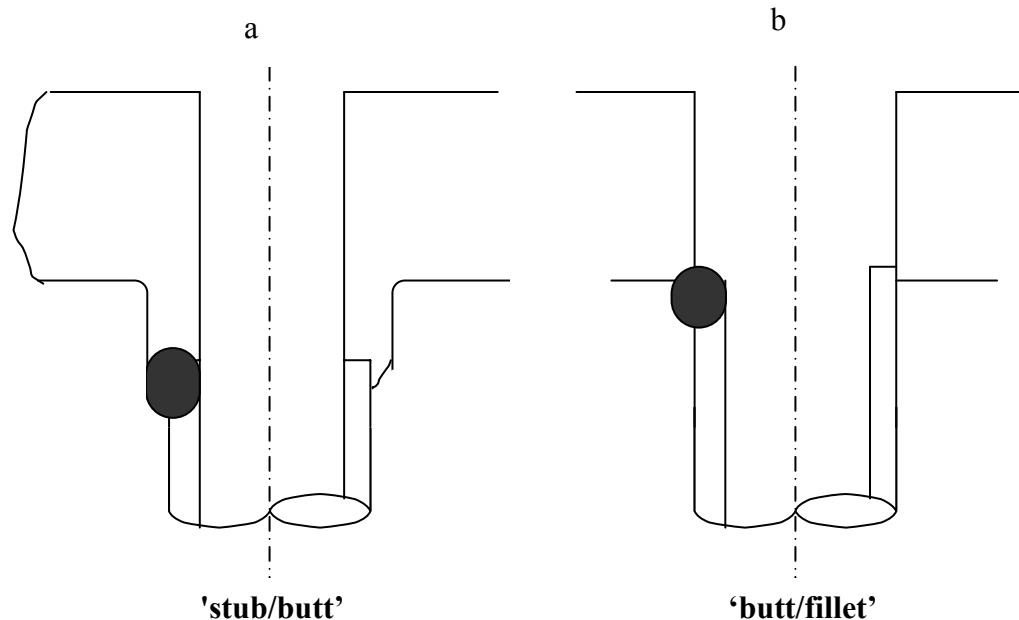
,b. PFR steam generator tube/plate weld joints.
